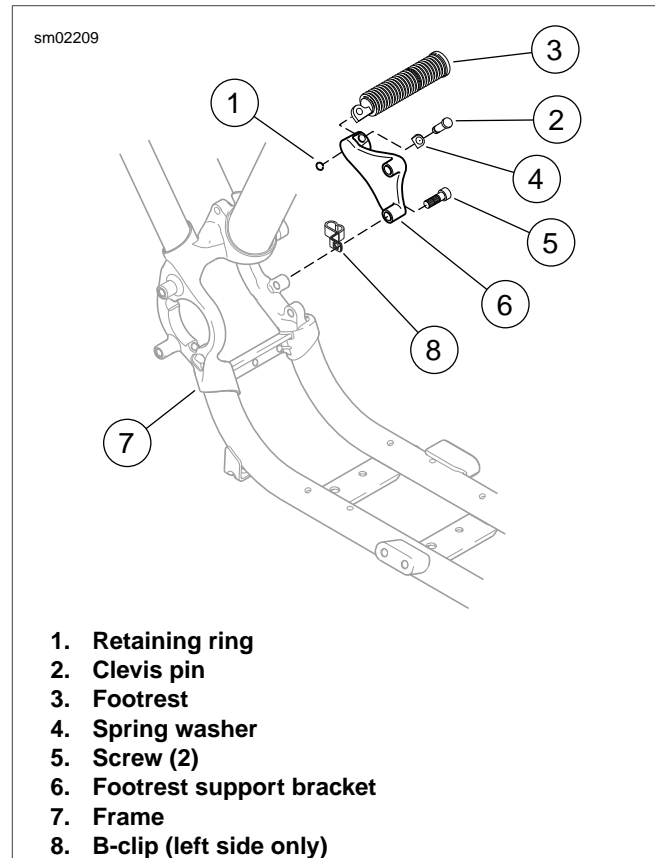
Passenger Footrest Assembly (Not Standard Equipment on Some Models)
